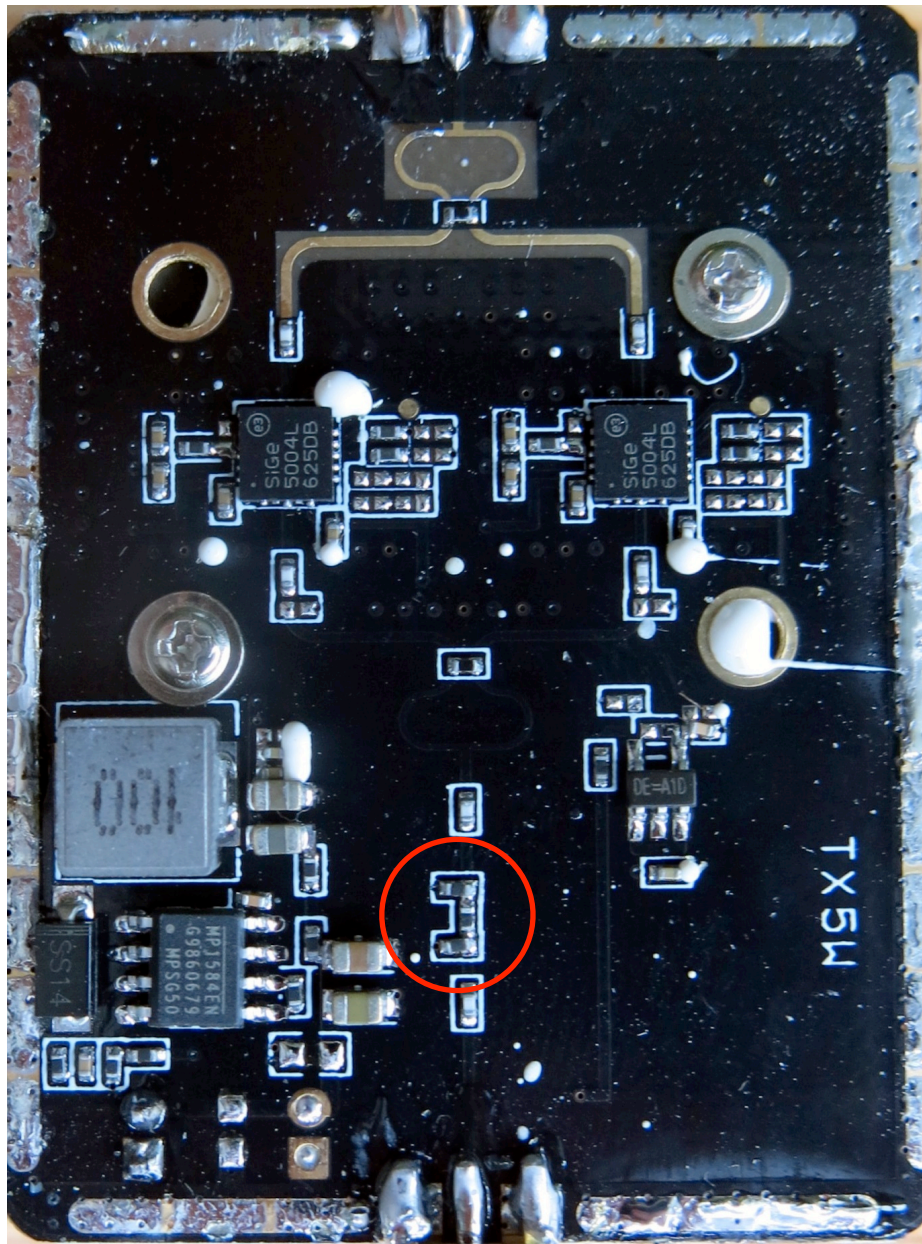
TXPA58002W5 PA module PCB showing input attenuator
